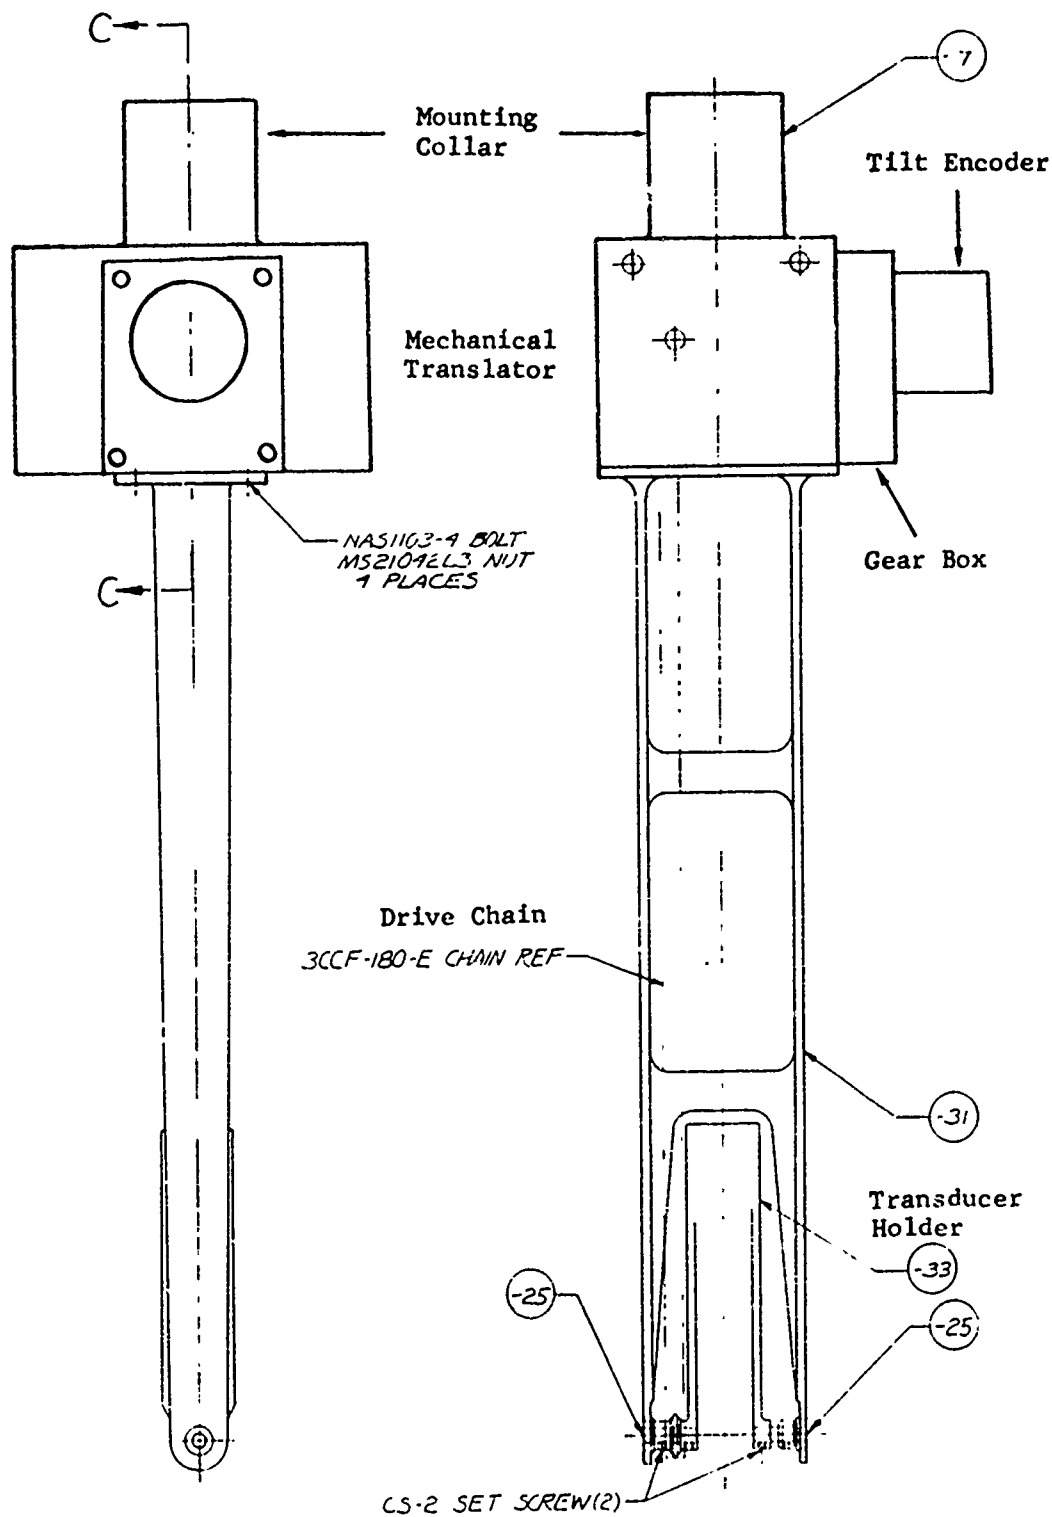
Assembly Drawing of Transducer Gimbal Mechanism
